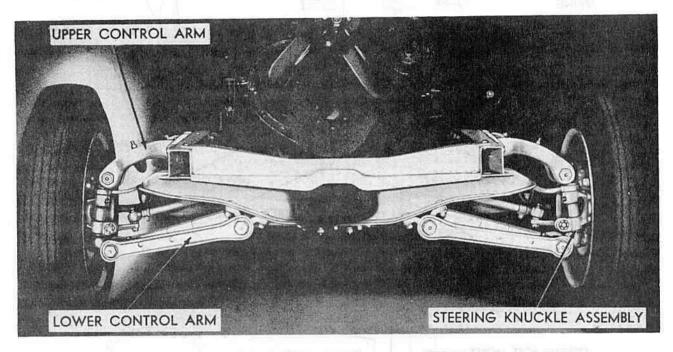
FULL FRONT VIEW OF CHAMPION FRONT SUSPENSION
